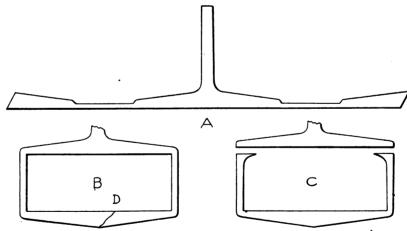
METHOD OF FORGING AN ENTIRE YOKE IN ONE PIECE.
